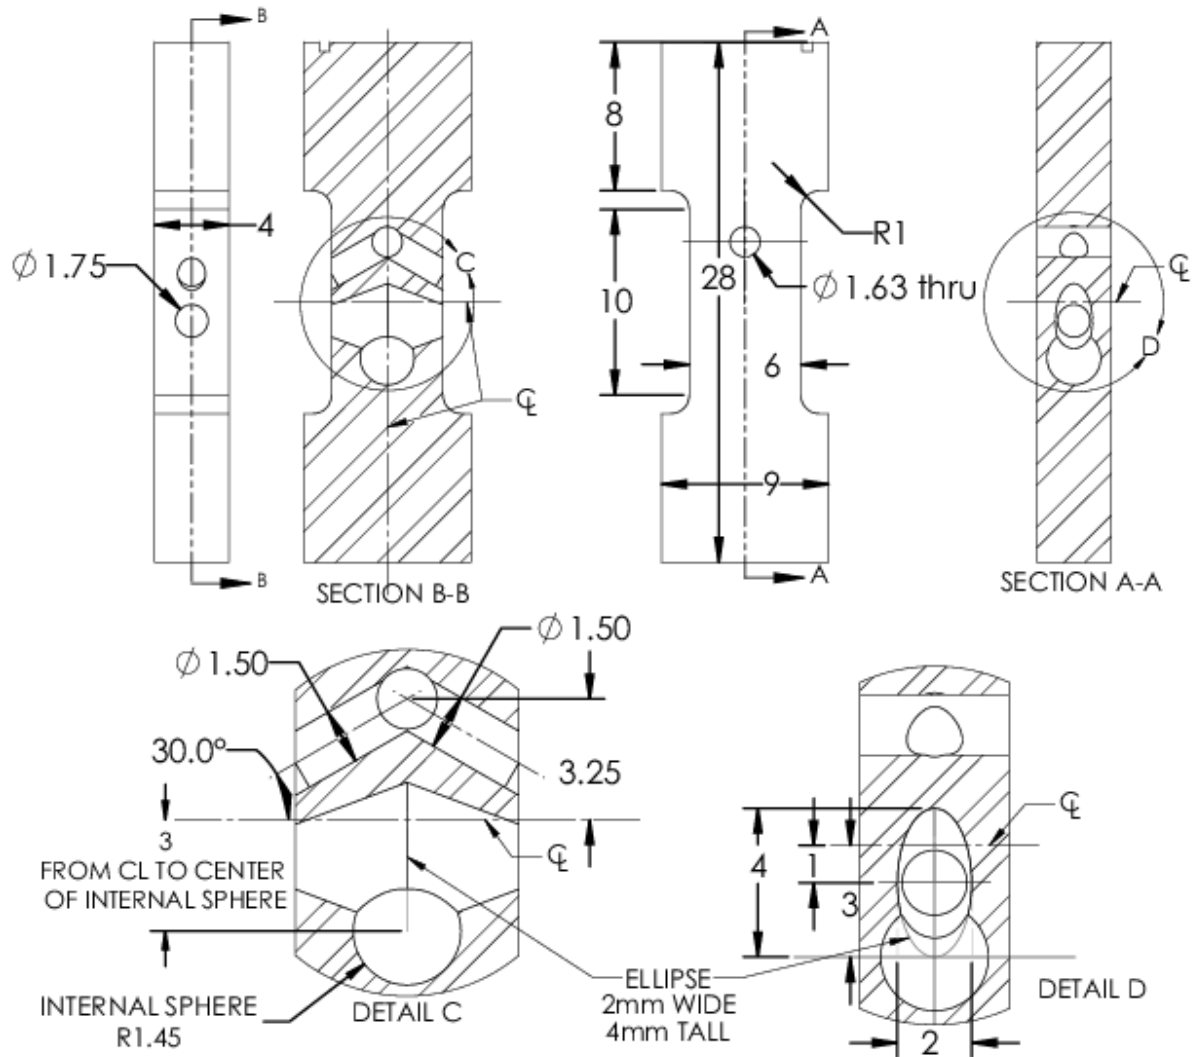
Dimensions of the third Sandia Fracture Challenge additively manufactured specimen geometry in millimeters.
